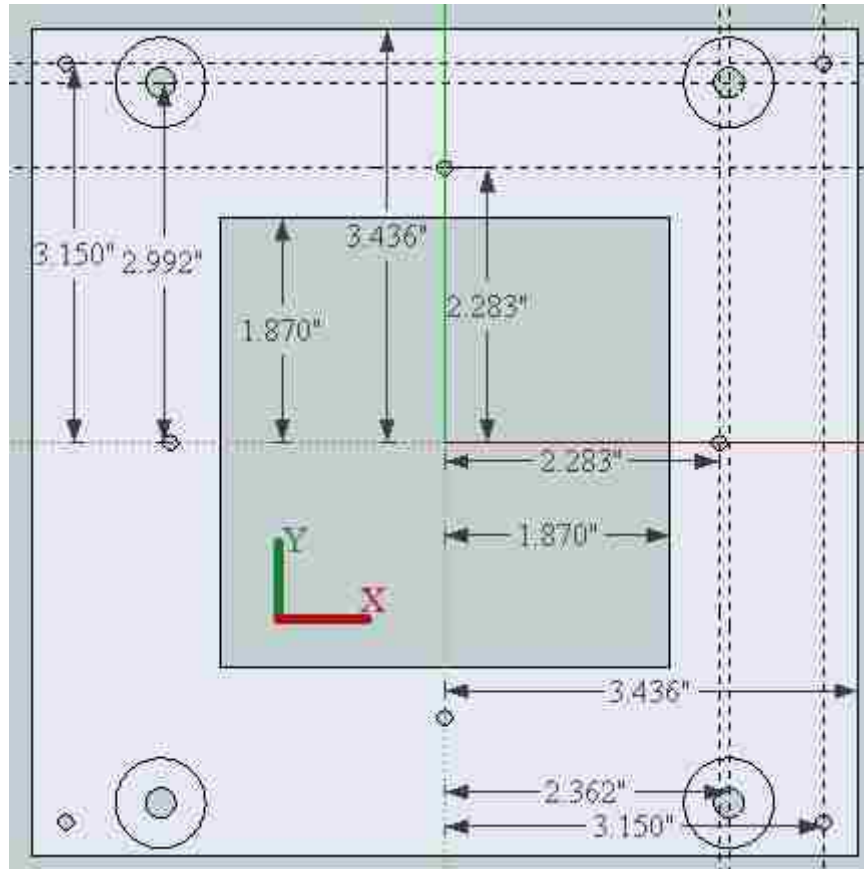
Top view of the 10x10 cm² lower trimmer aluminum plate illustrating the in-plane and cross-plane dimensions. The lower trimmer is square, such that all non-hole dimensions are equal in the in-plane and cross-plane dimensions.
